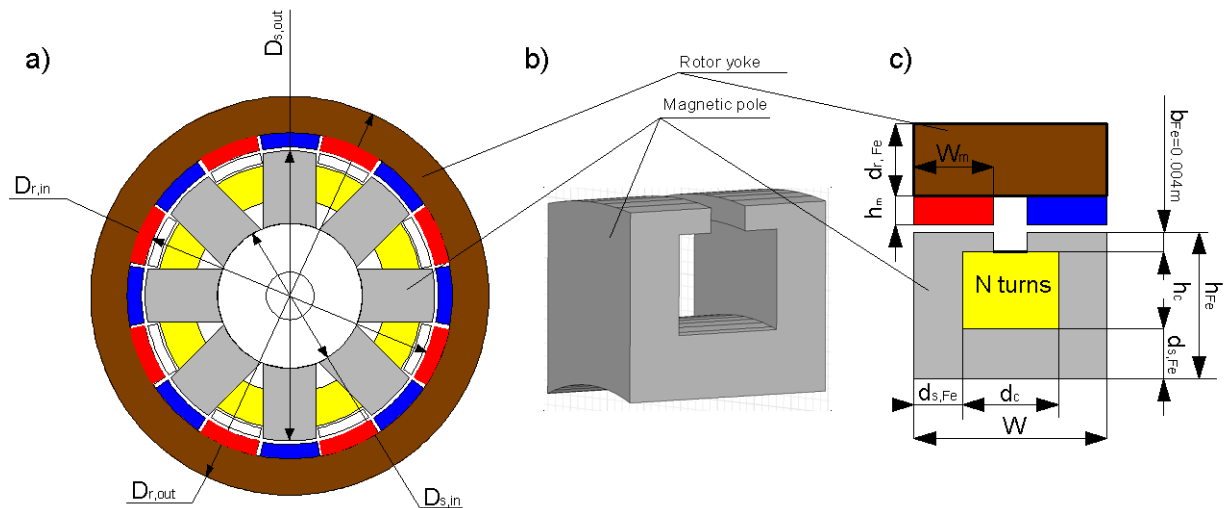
Dimensioning details of PMTF machine: a) radial cross-section, b) stator pole view, c) axial cross-section view
